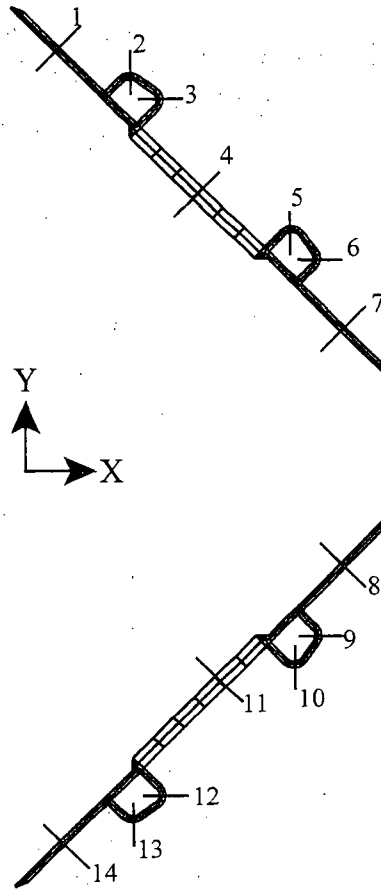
PWR Side Support Weldment Section Cuts – 45° Basket Orientation
